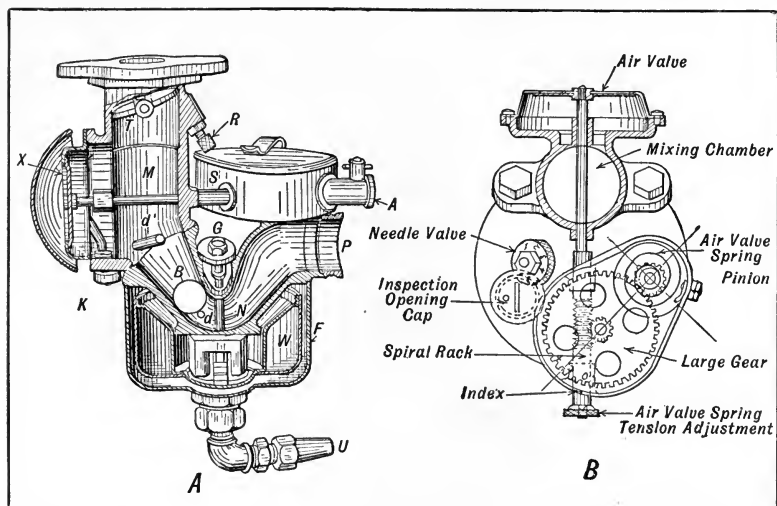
Sectional View of Excelsior Carburetor. A—Side Section Depicting Floating Ball Controlling Mixture Passage. B—Showing Peculiar Air Valve Spring and Geared Control of Air Valve Stem.
